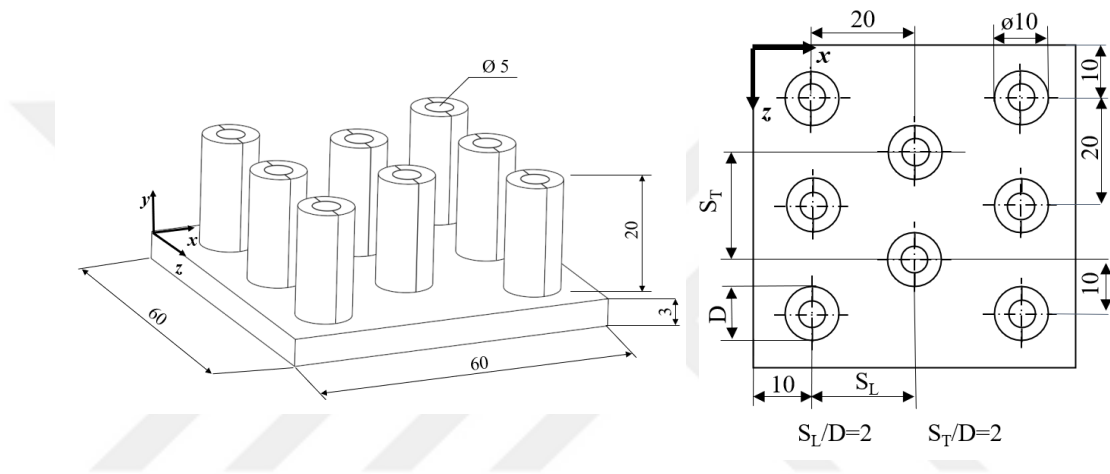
Schematic view of FC-PFHS (dimensions in mm)
